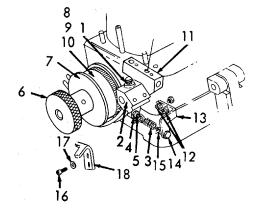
Belt Finger Holder and Cushion Spring Removal.
